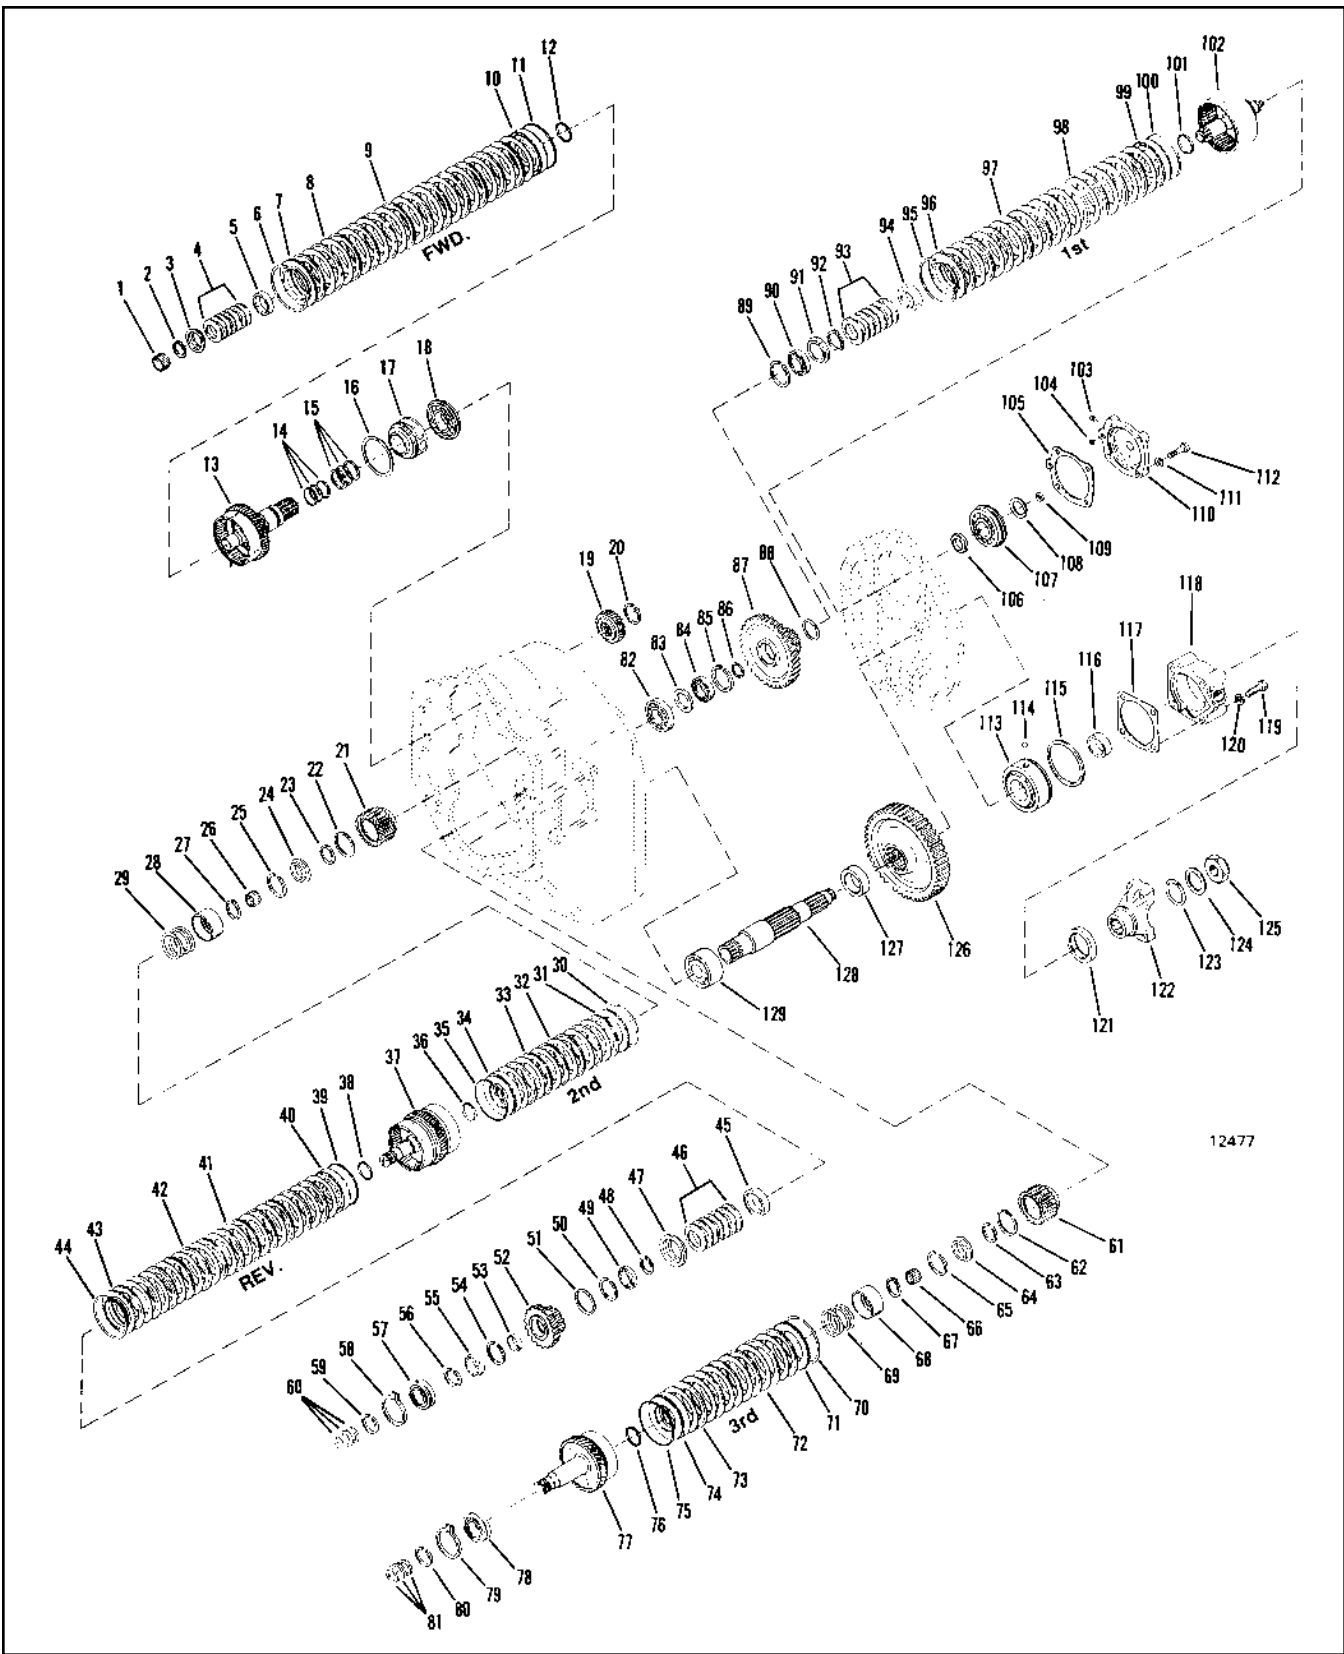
GEAR AND CLUTCH GROUP (Sheet 1 of 2)
